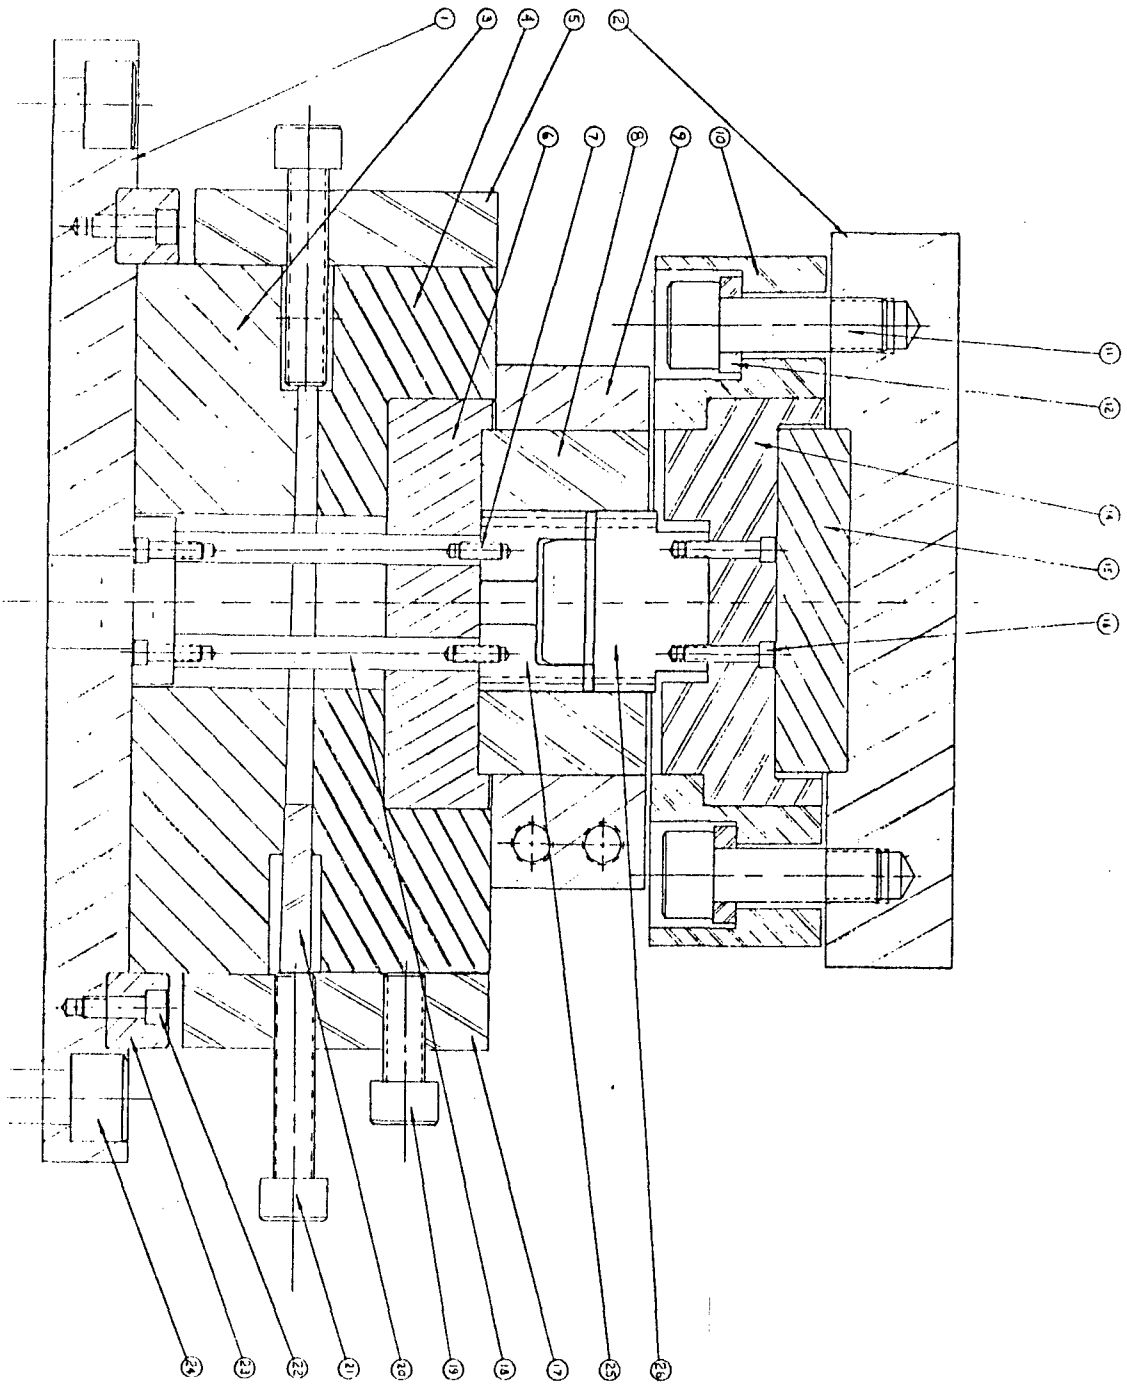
Drawing of Tooling Assembly for Forging M-2 Pinion Gear
